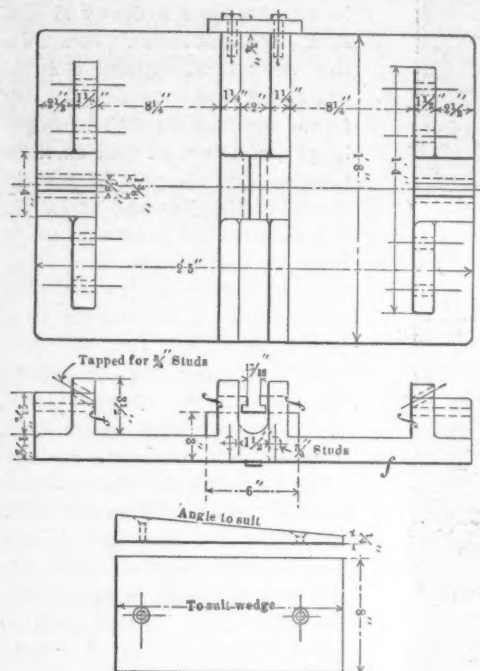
JIG USED FOR MILLING SHOES AND WEDGES AND CROSS-HEAD SHOES.
